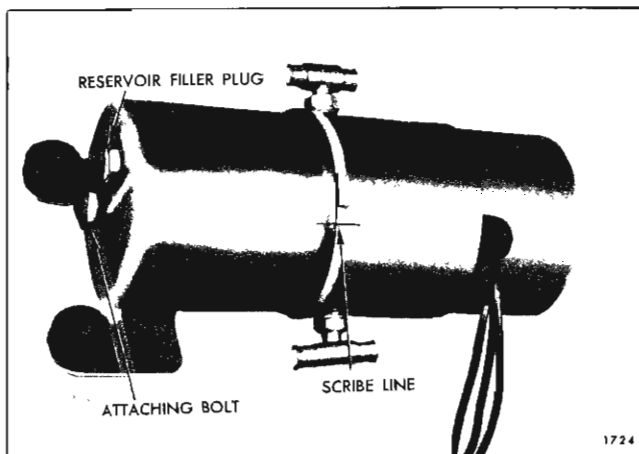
Hydro-Lectric Motor and Pump Assembly
